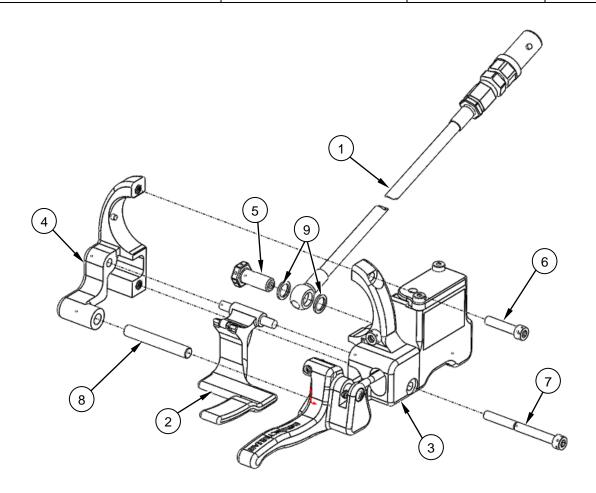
Single Master Cylinder Assembly P/N 232-626-10
